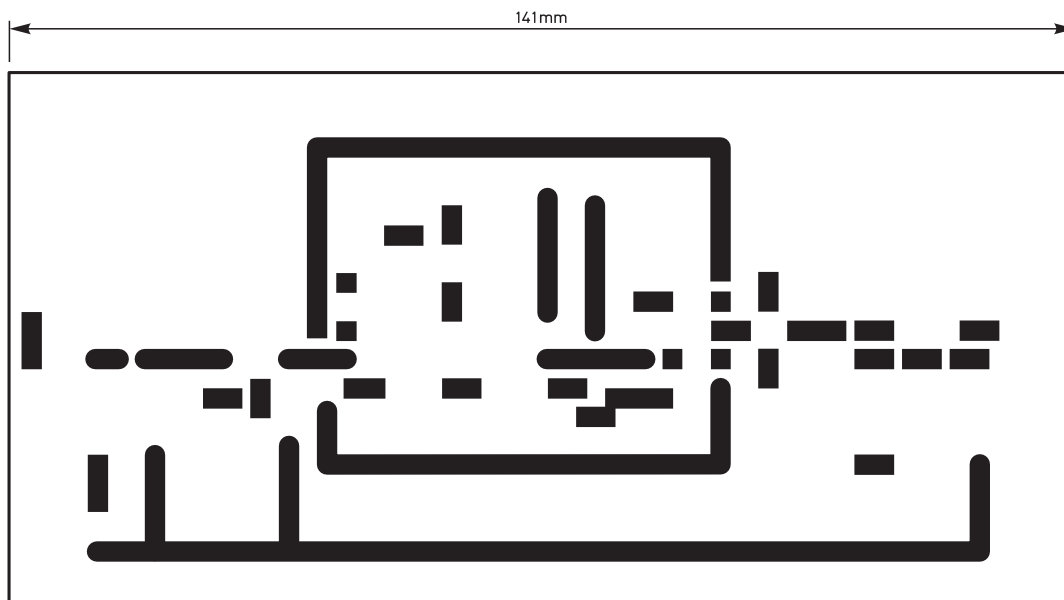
PCB layout for the combined 2m and 70cm signal source
